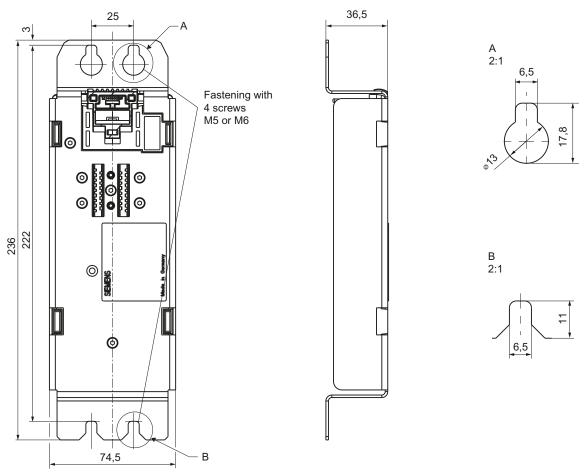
SIMOTION D410-2 DP dimension drawing
